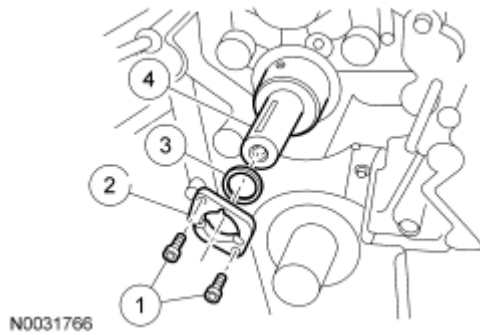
Camshaft, Spacer, Thrust Plate & Bolts
